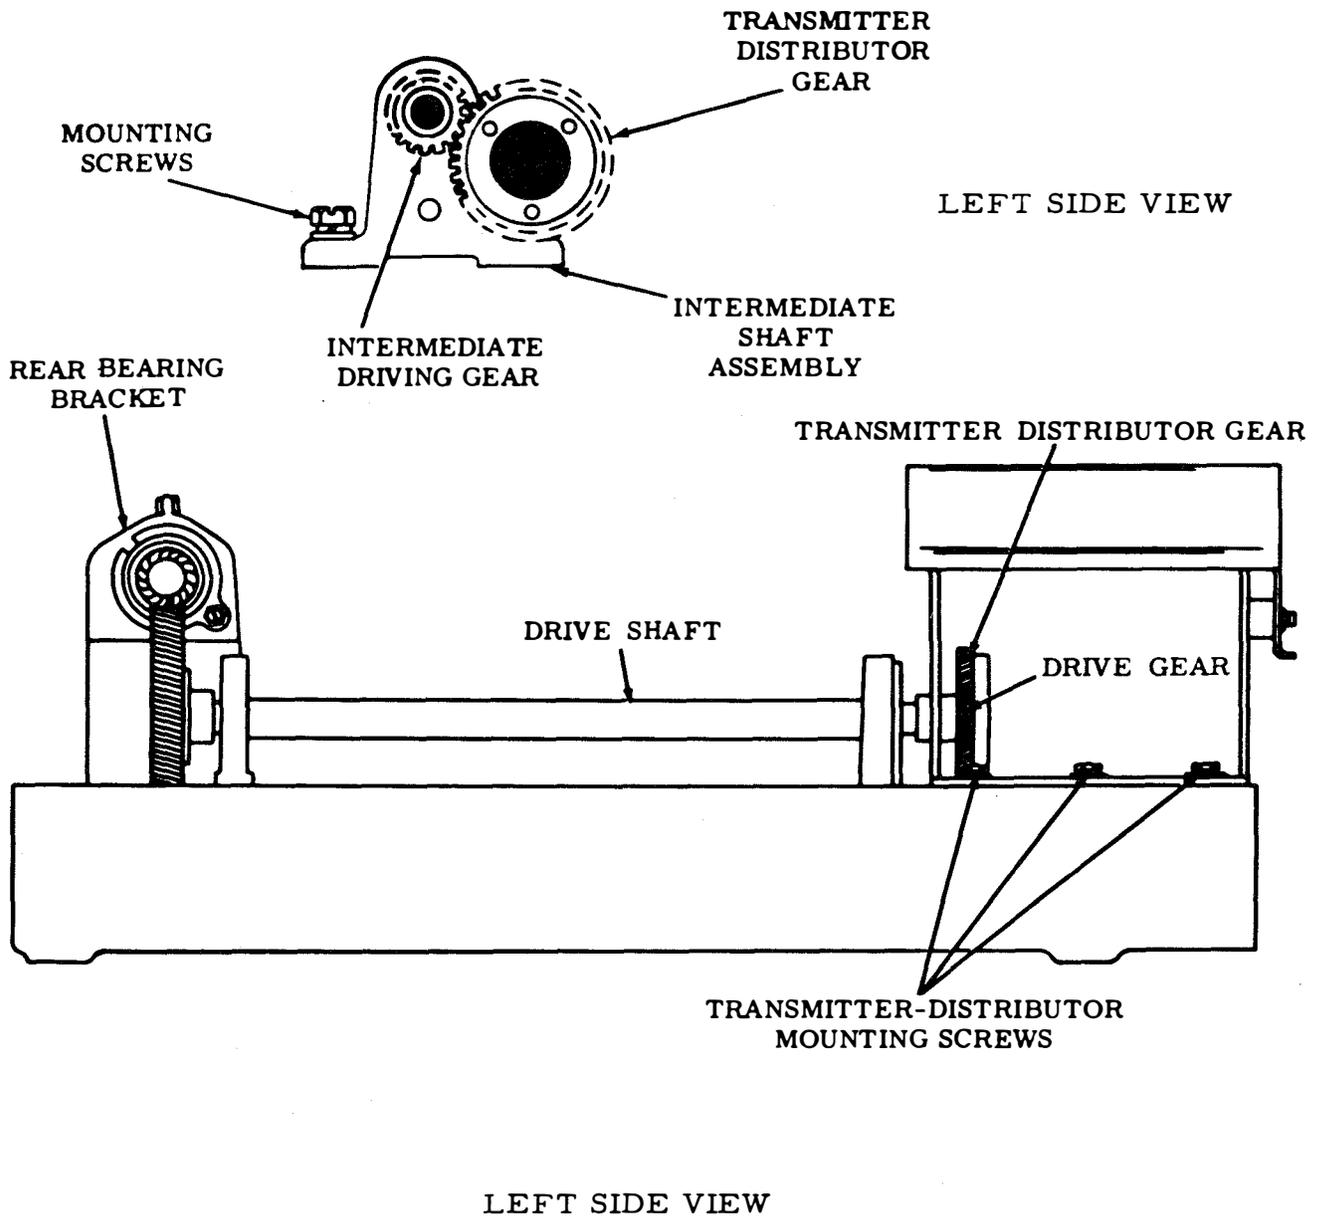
Intermediate Gear - Transmitter Distributor Gear Backlash
